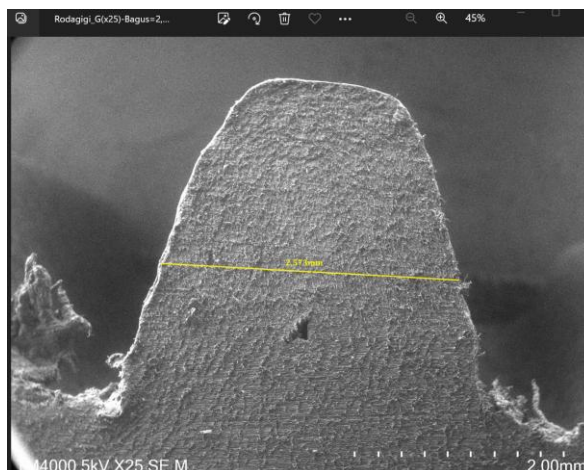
SEM photo for tooth thickness of worm gear ring for 3D printed Onyx material without torsion testing as a comparison of tooth thickness (G code)
